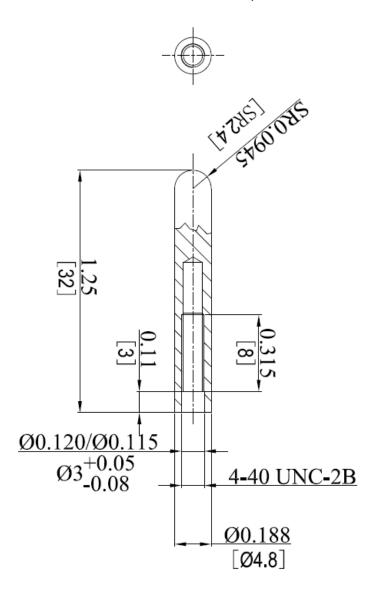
Test Metal Electrode Dimensions, Inch [mm]
